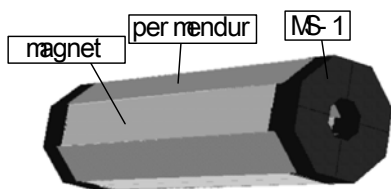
Inner ring structure: 4 pieces of permendur and 2 pieces of MS-1 support the permanent magnet pieces.
